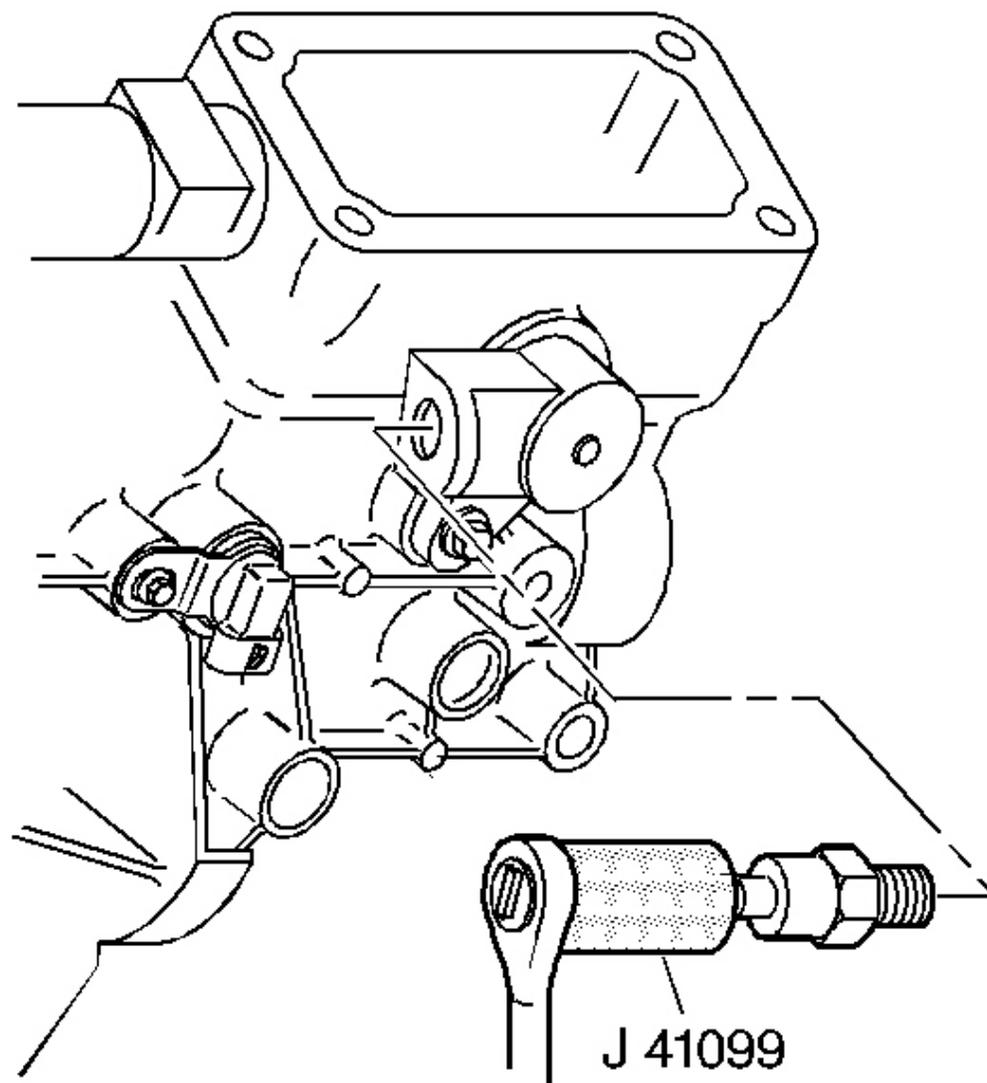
Installing Reverse Lockout Solenoid Into Reverse Lockout Body Using J 41099
